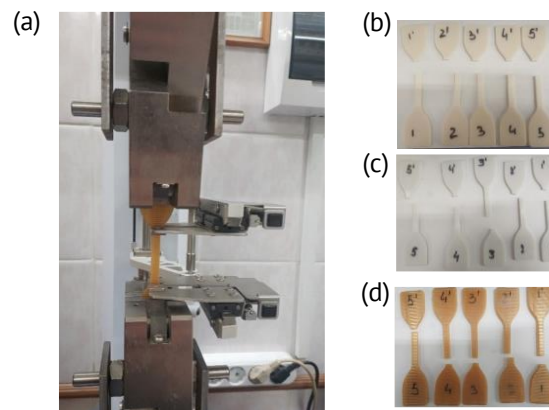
Photographs of the: (a) tensile testing machine; (b) ABS-M30i specimens; (c) PC-ISO specimens; (d) Ultem 1010 resin specimens
